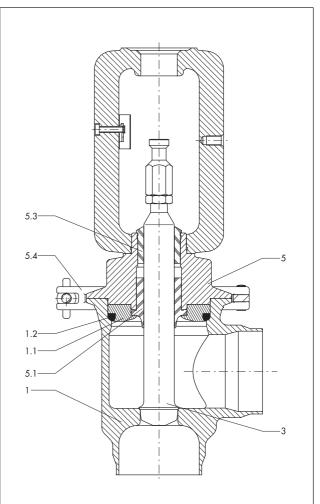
· Type 3347 Valve with hollow-mold cast body
